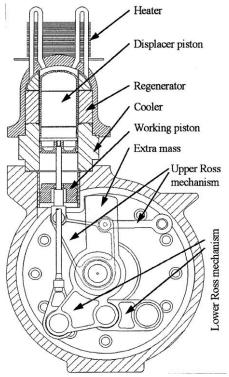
Cross-sectional view of 3-kW SE developed by Thorsen et al. [22].
